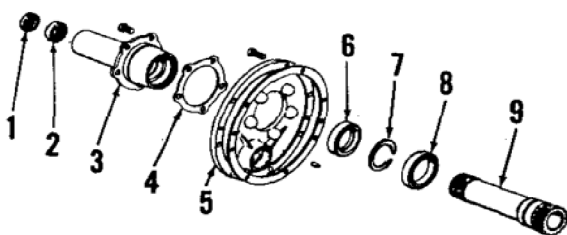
Exploded view of front support plate and associated parts used on dual clutch models. Transmission input shaft (14—Fig. 193) will remain with transmission and is not removed with front support plate.
